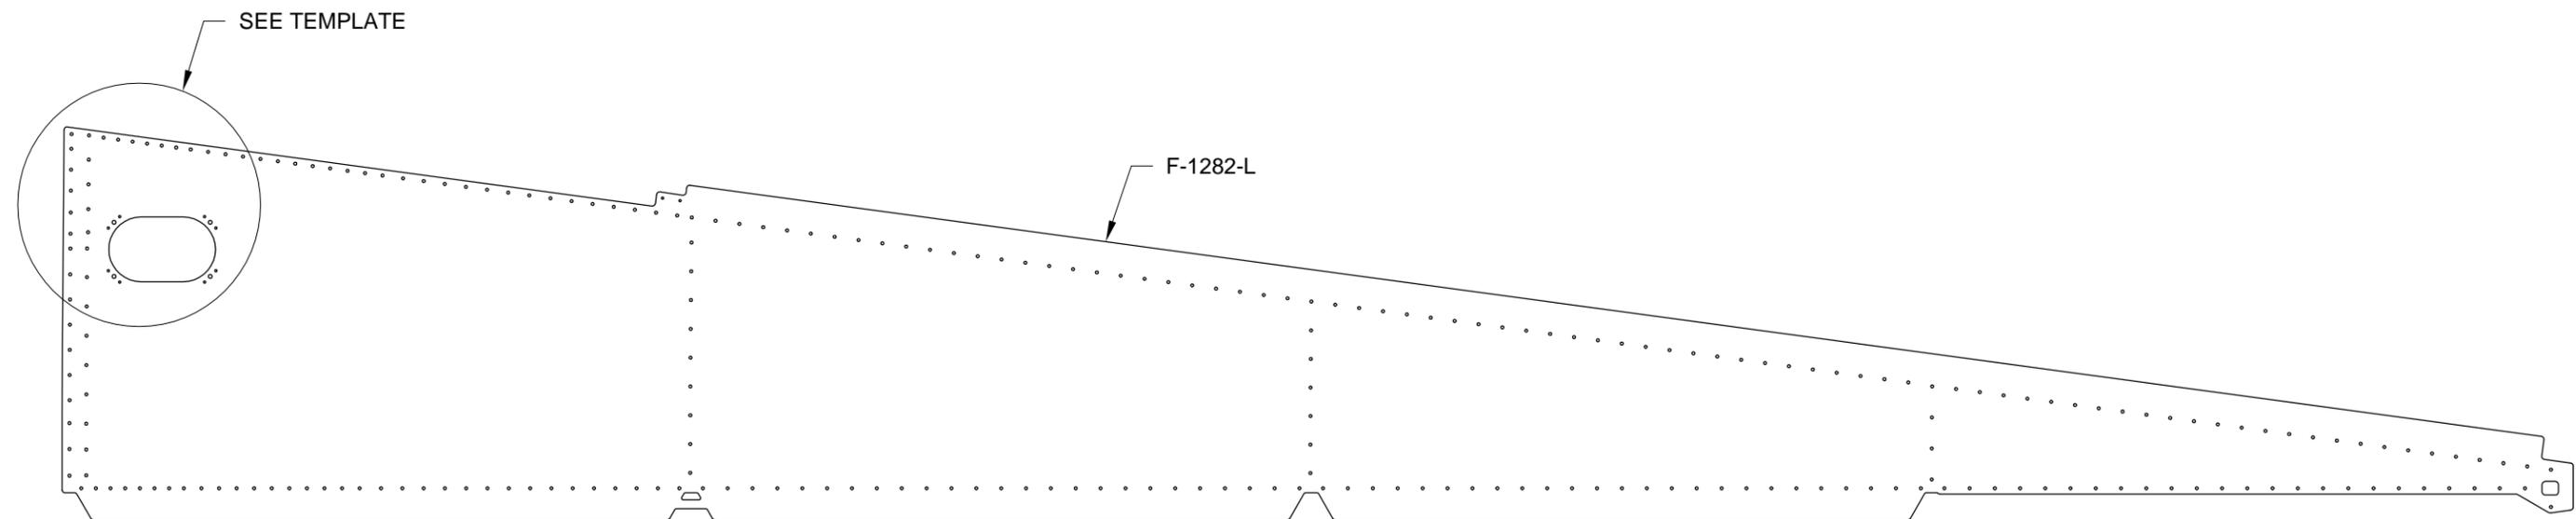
BOTTOM LEFT SKIN CUTOUT
